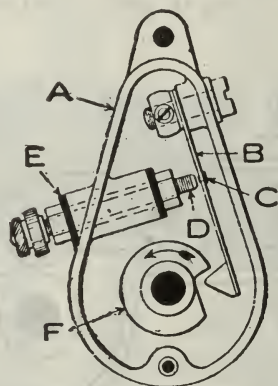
,985.—Contact maker and mechanical vibrator. The case, A, is usually attached to the gear box of the engine; B, is the vibrator blade; C, a platinum contact point; D, an insulated adjusting screw; E, a bushing with insulation; F, the operating cam. As this cam revolves the weight on the end of blade, B, drops into the recess on the cam causing the blade to vibrate and make a number of contacts with D, thus producing a series of sparks when in operation.
